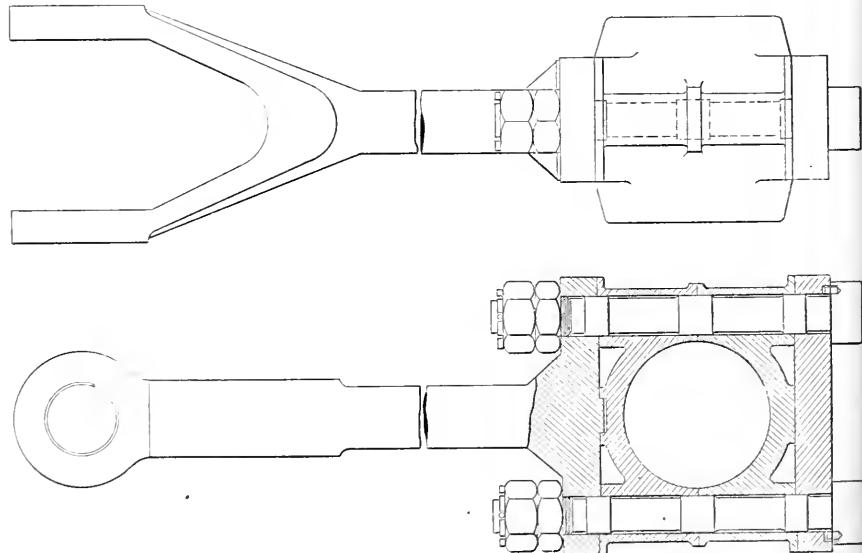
TWO-BEARING CROSSHEAD OF MARINE TYPE
